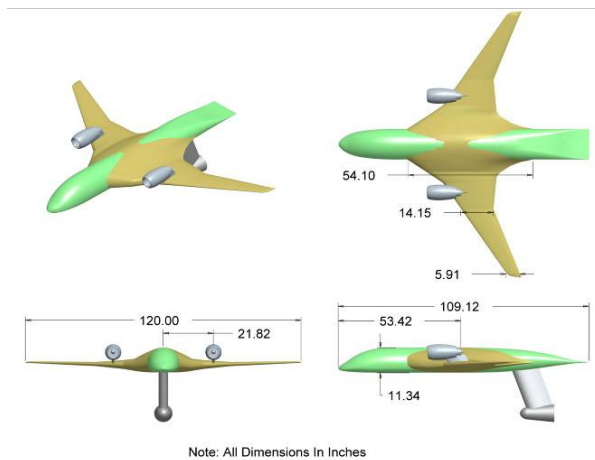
Three-view drawing of AMELIA with sting-blade attachment with the tail surfaces removed.
